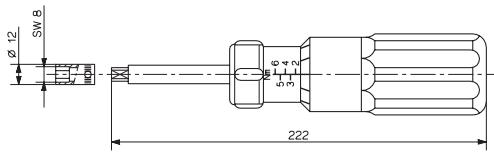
Torque wrench 1 ... 6 N·m Type 1300A17
